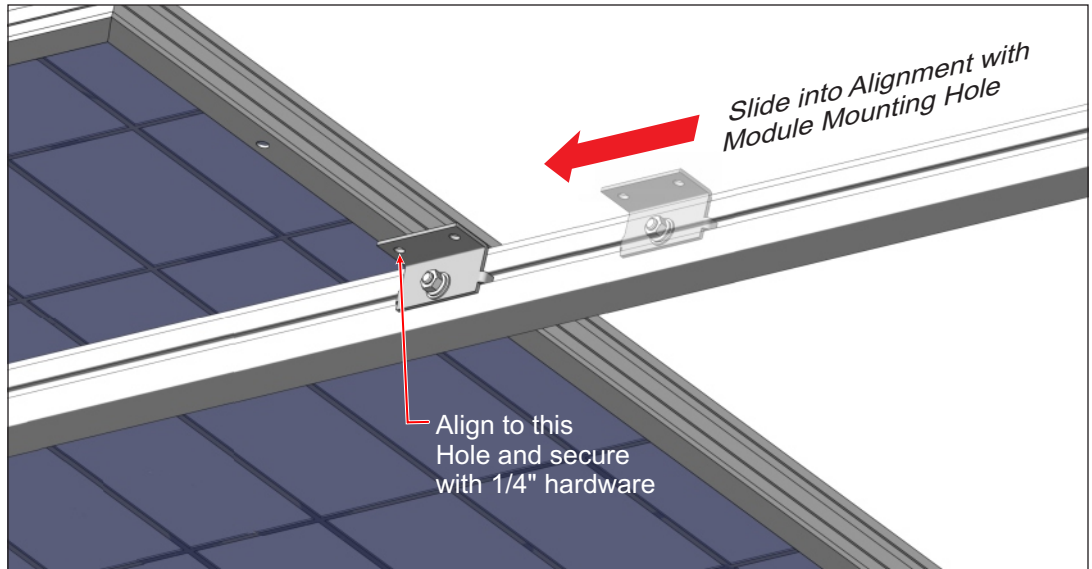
Aligning the Double Hole Slide Plate with PV Module Mounting Hole
